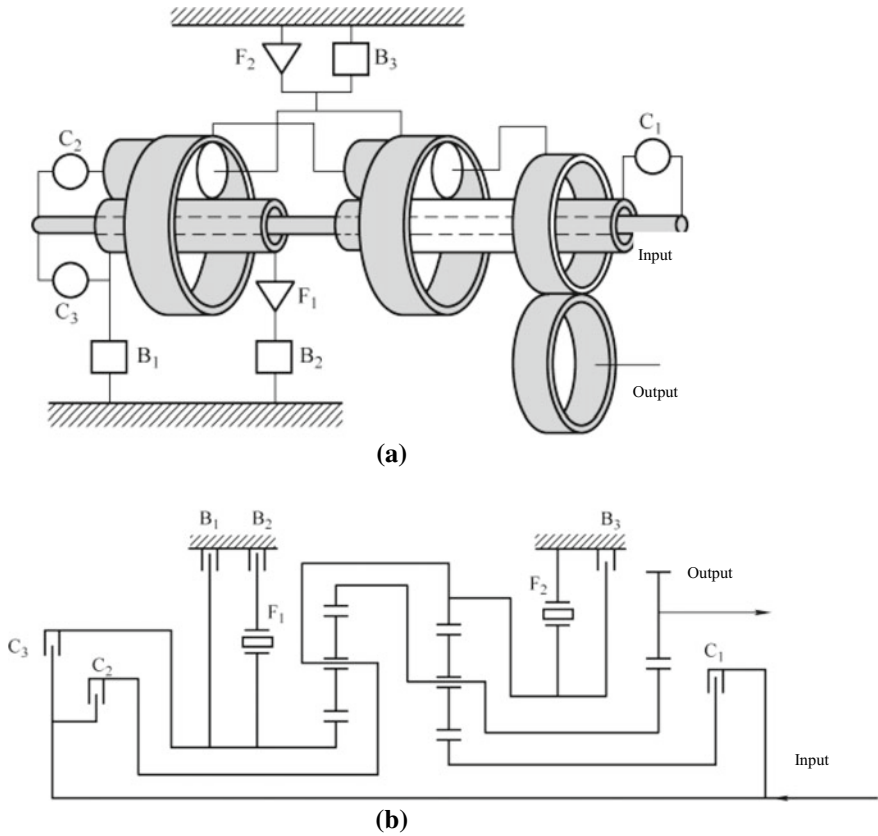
Structure and drive route of U340E AT. B₁—Overdrive/2 speed brake, B₂—2 speed brake, B₃—1 speed/reverse gear brake, C₁—forward clutch, C₂—direct gear clutch, C₃—reverse clutch, F₁, F₂—OWC
